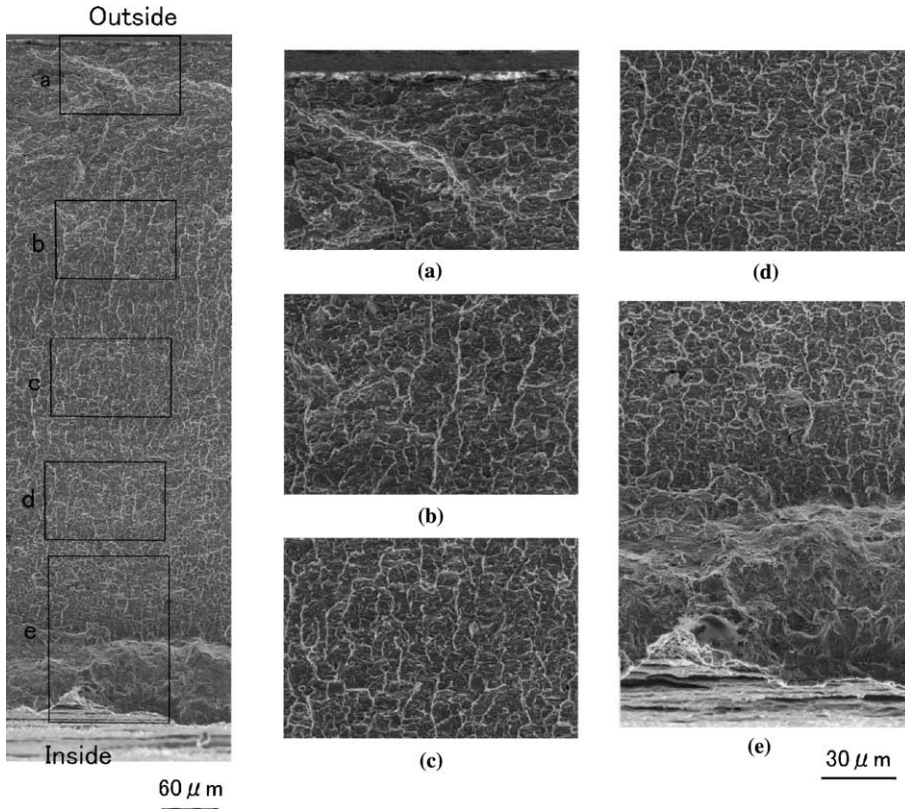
Morphology of fracture surface of P4(D8/F3-5) specimen.
